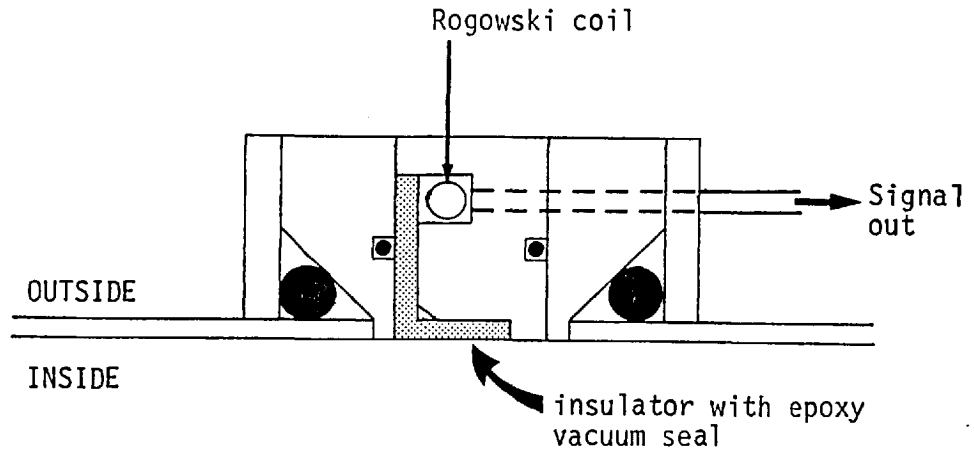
Section through Rogowski coil mounting flange showing the vacuum seals and the gap insulator through which the B_{θ} field can pass.
